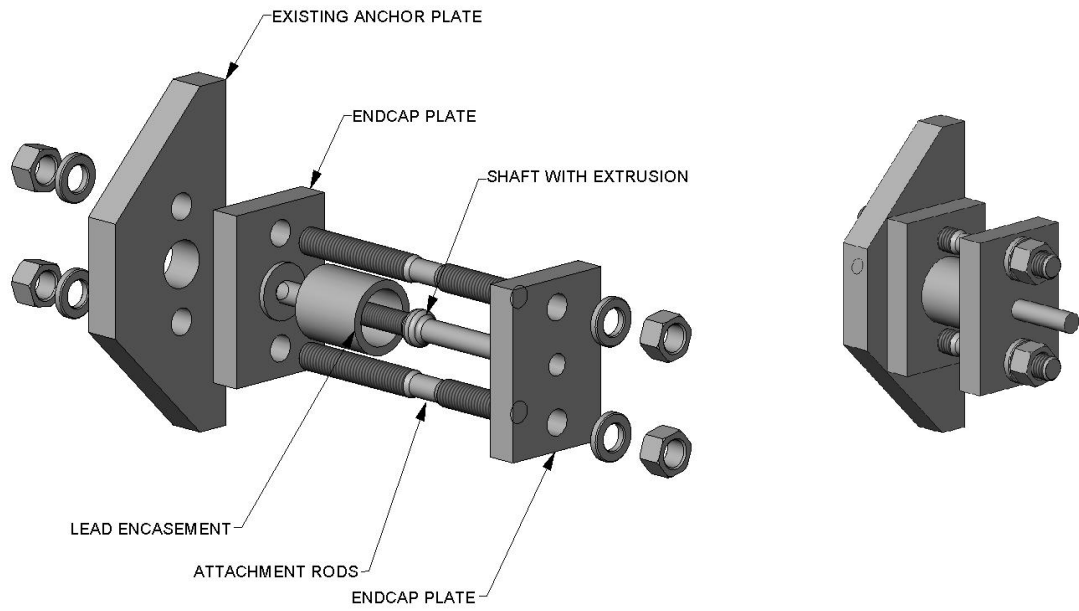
The lead-extrusion damper externally mounted to the beam's anchor plate (Rodgers, 2006).
